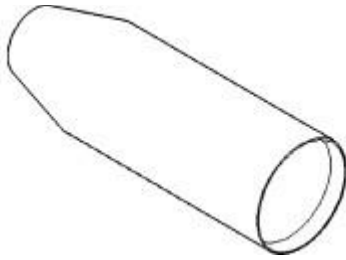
INSTALLER, CRANKSHAFT SEAL - 6780
